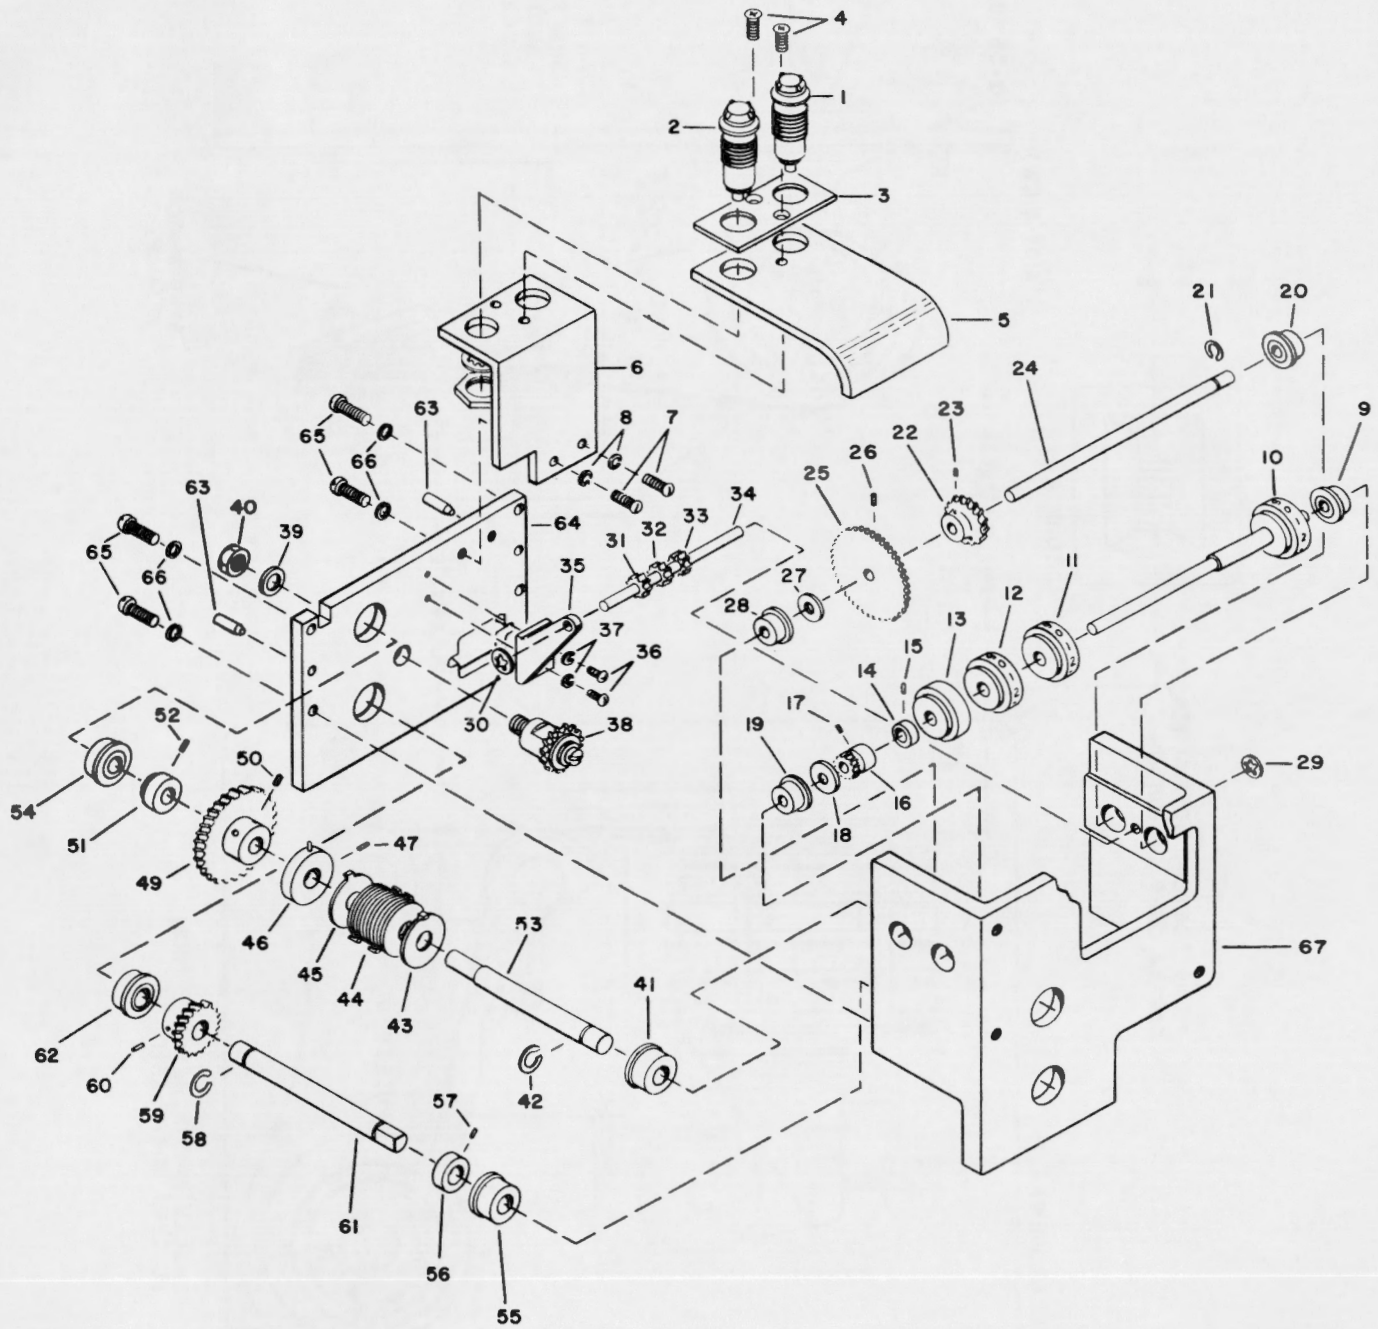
Secondary Tuning Module A1A16, Exploded View of Counter
